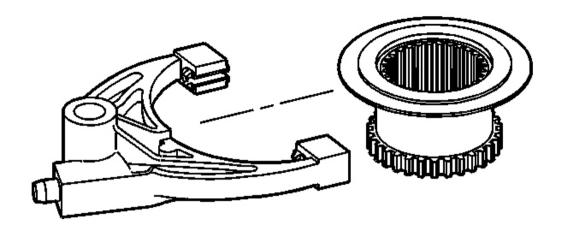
View Of Range Shift Fork & Range Shift Sleeve Courtesy of GENERAL MOTORS CORP.
